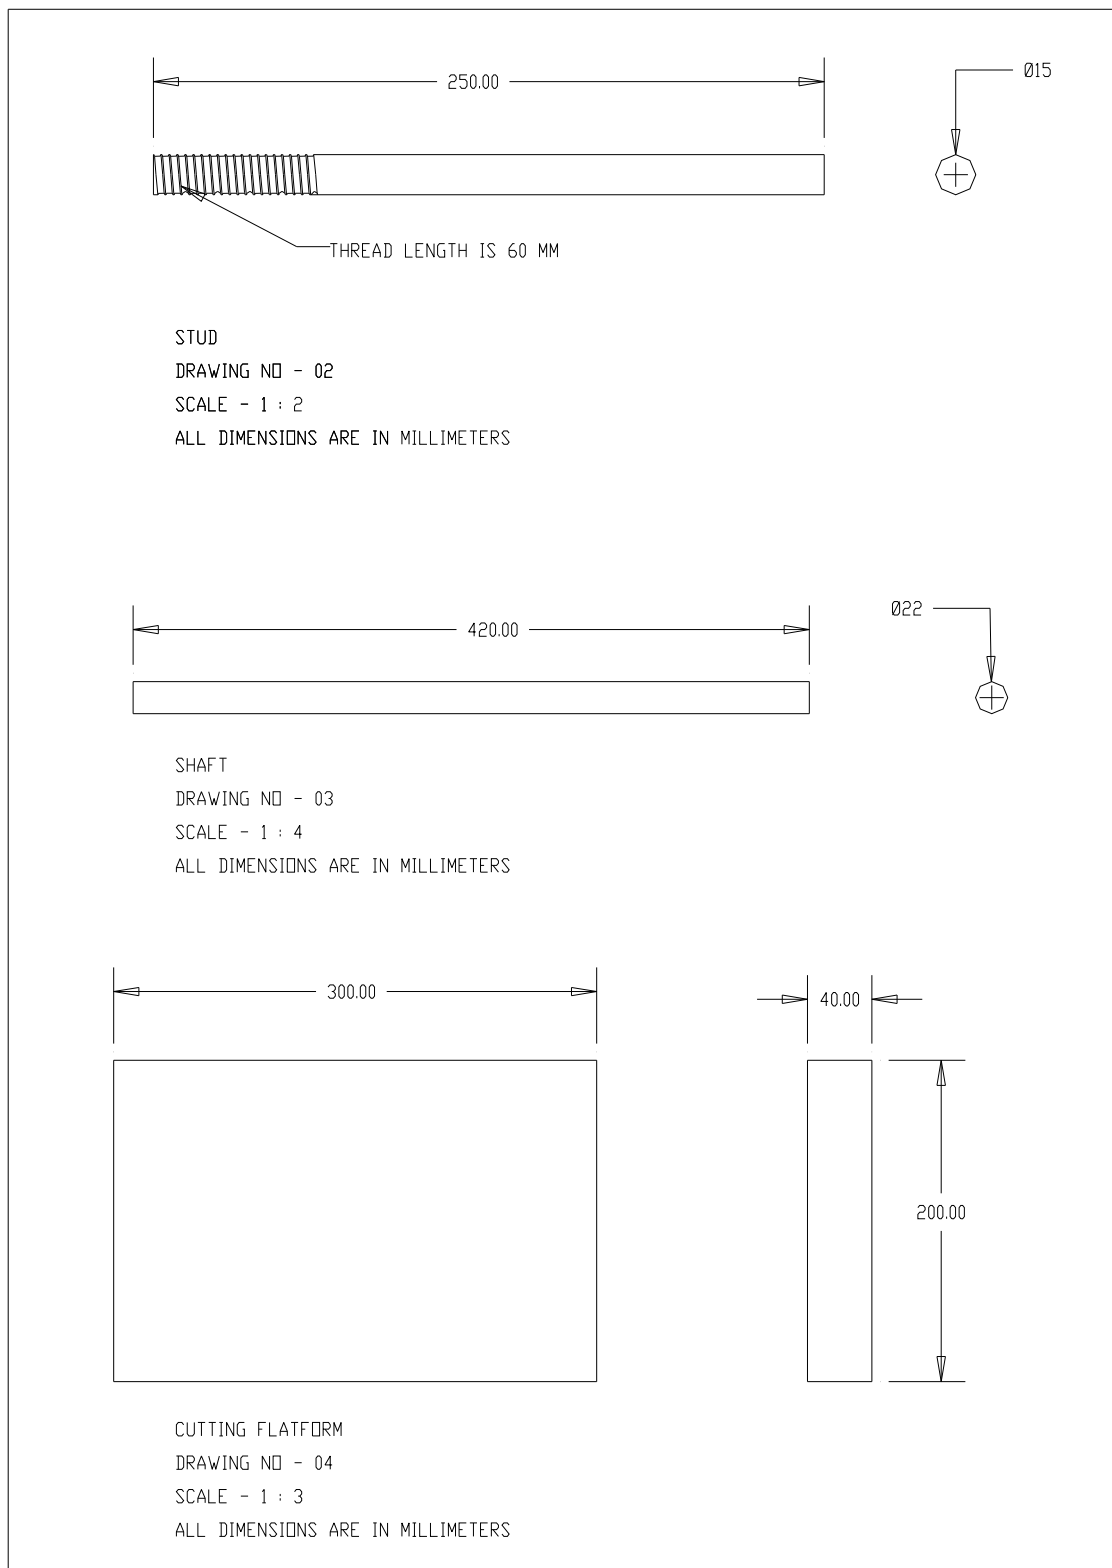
Detailed drawing of stud, shaft and cutting platform
